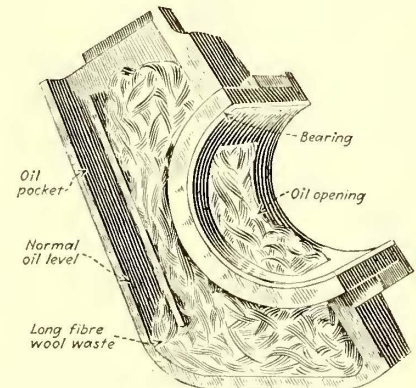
SKETCH OF ARMATURE BEARING FOR SPLIT FRAME MOTOR
